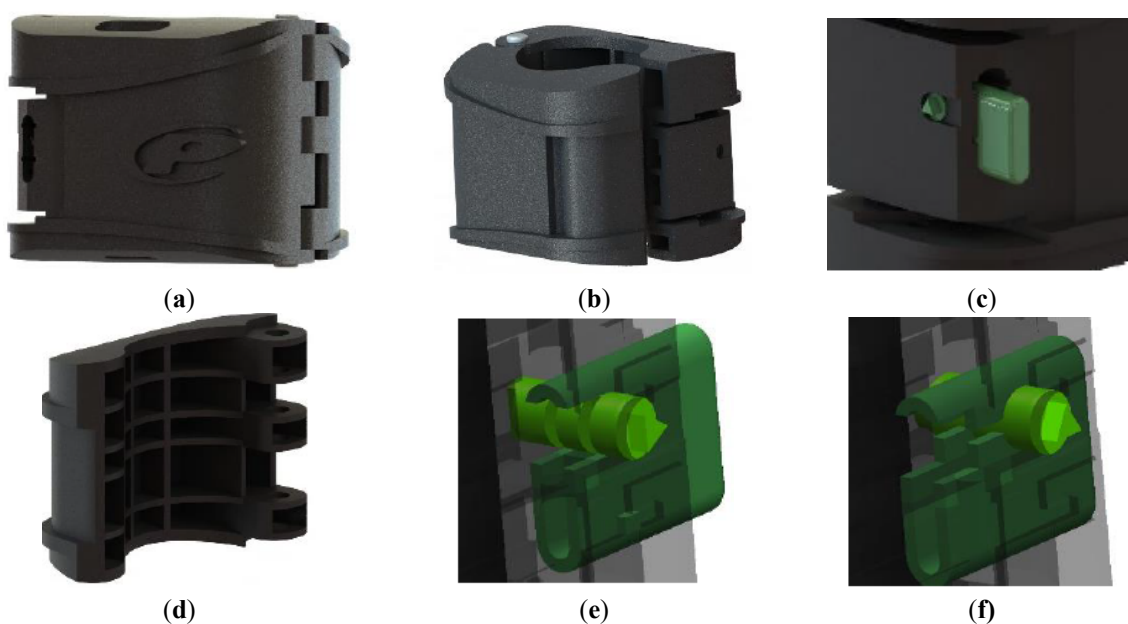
Final coupling system design (a) frontal view, (b) overview, (c) locker button, (d) left claw interior, (e) pin on locking position, (f) pin on unlocking position.
